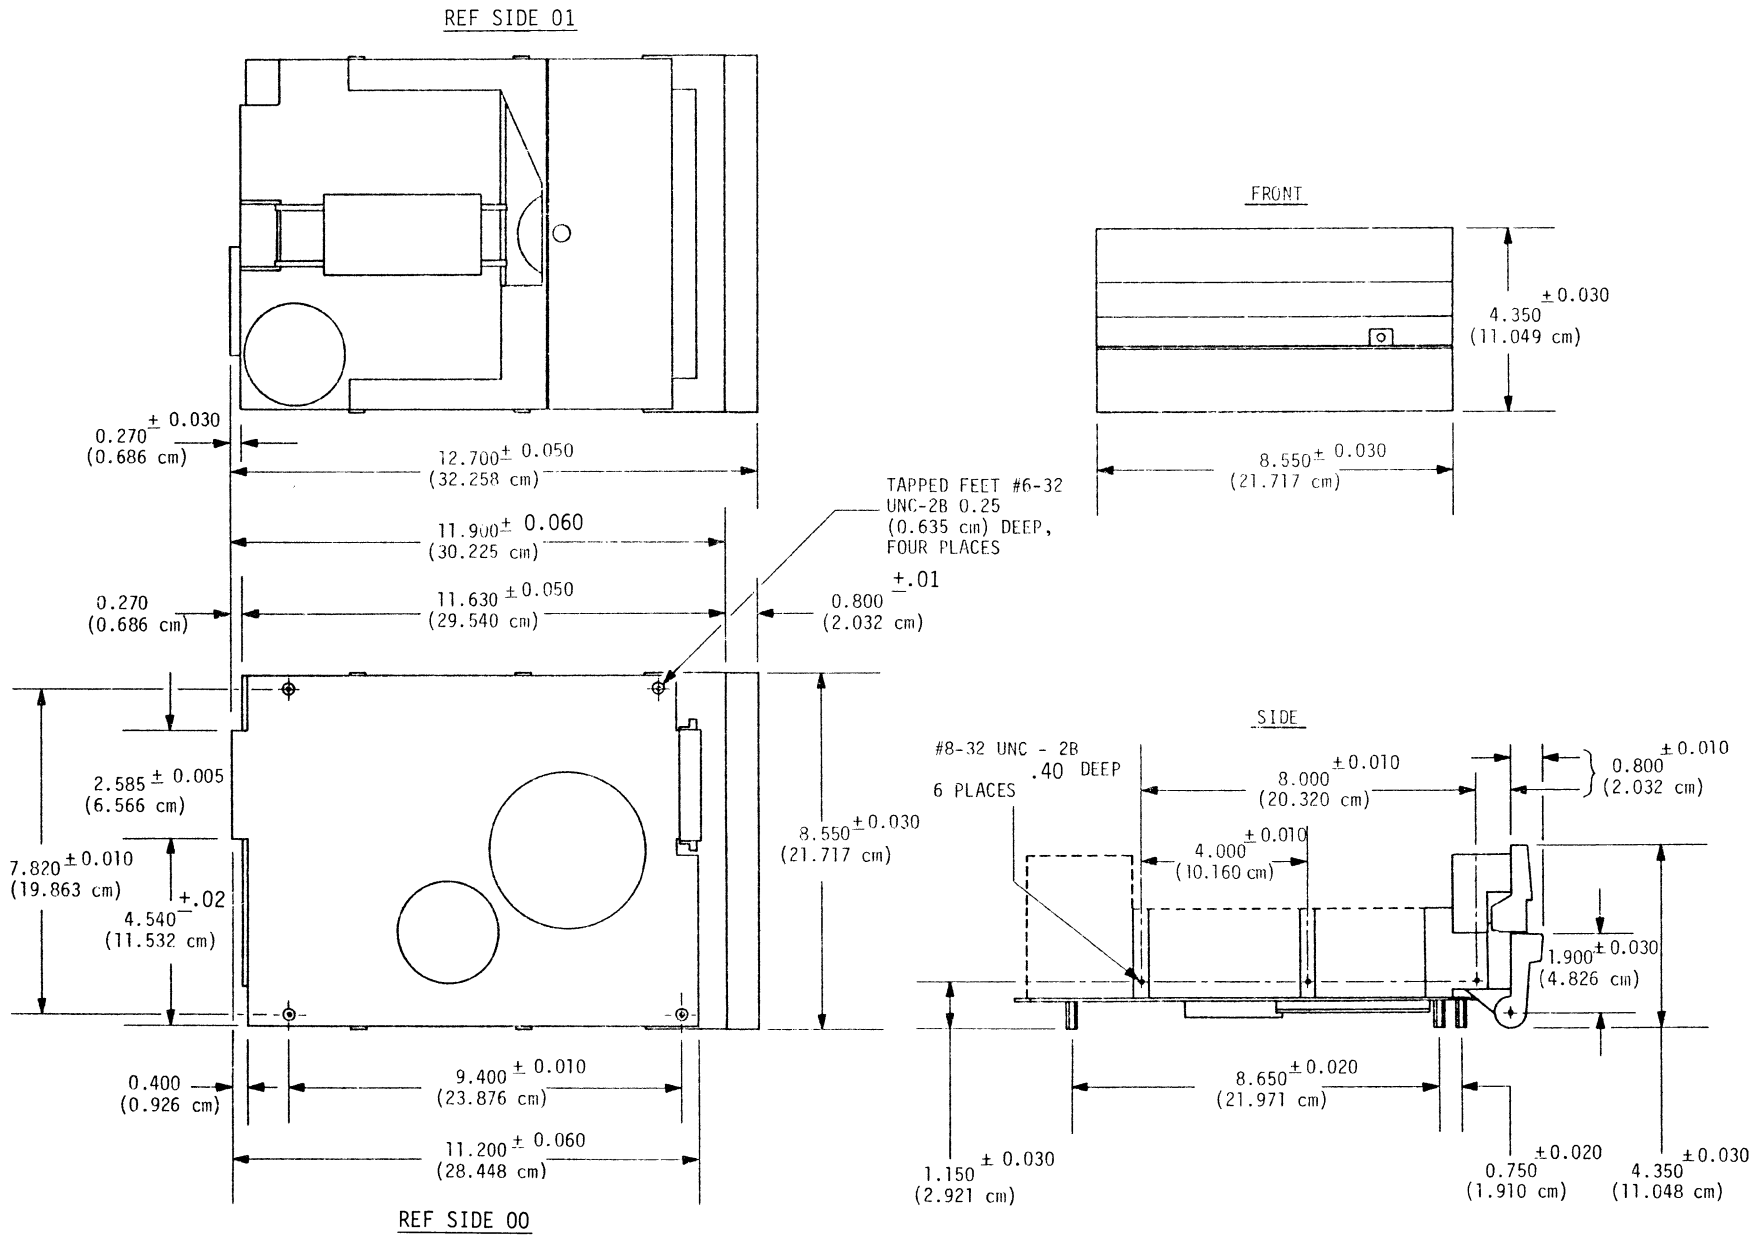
MECHANICAL INTERFACE DRAWING
